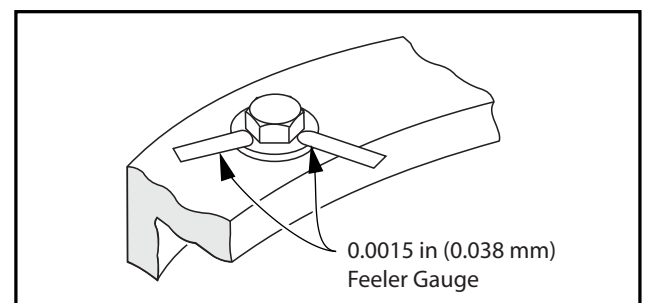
Turntable Side Bearing Bolt Feeler Gauge Check
